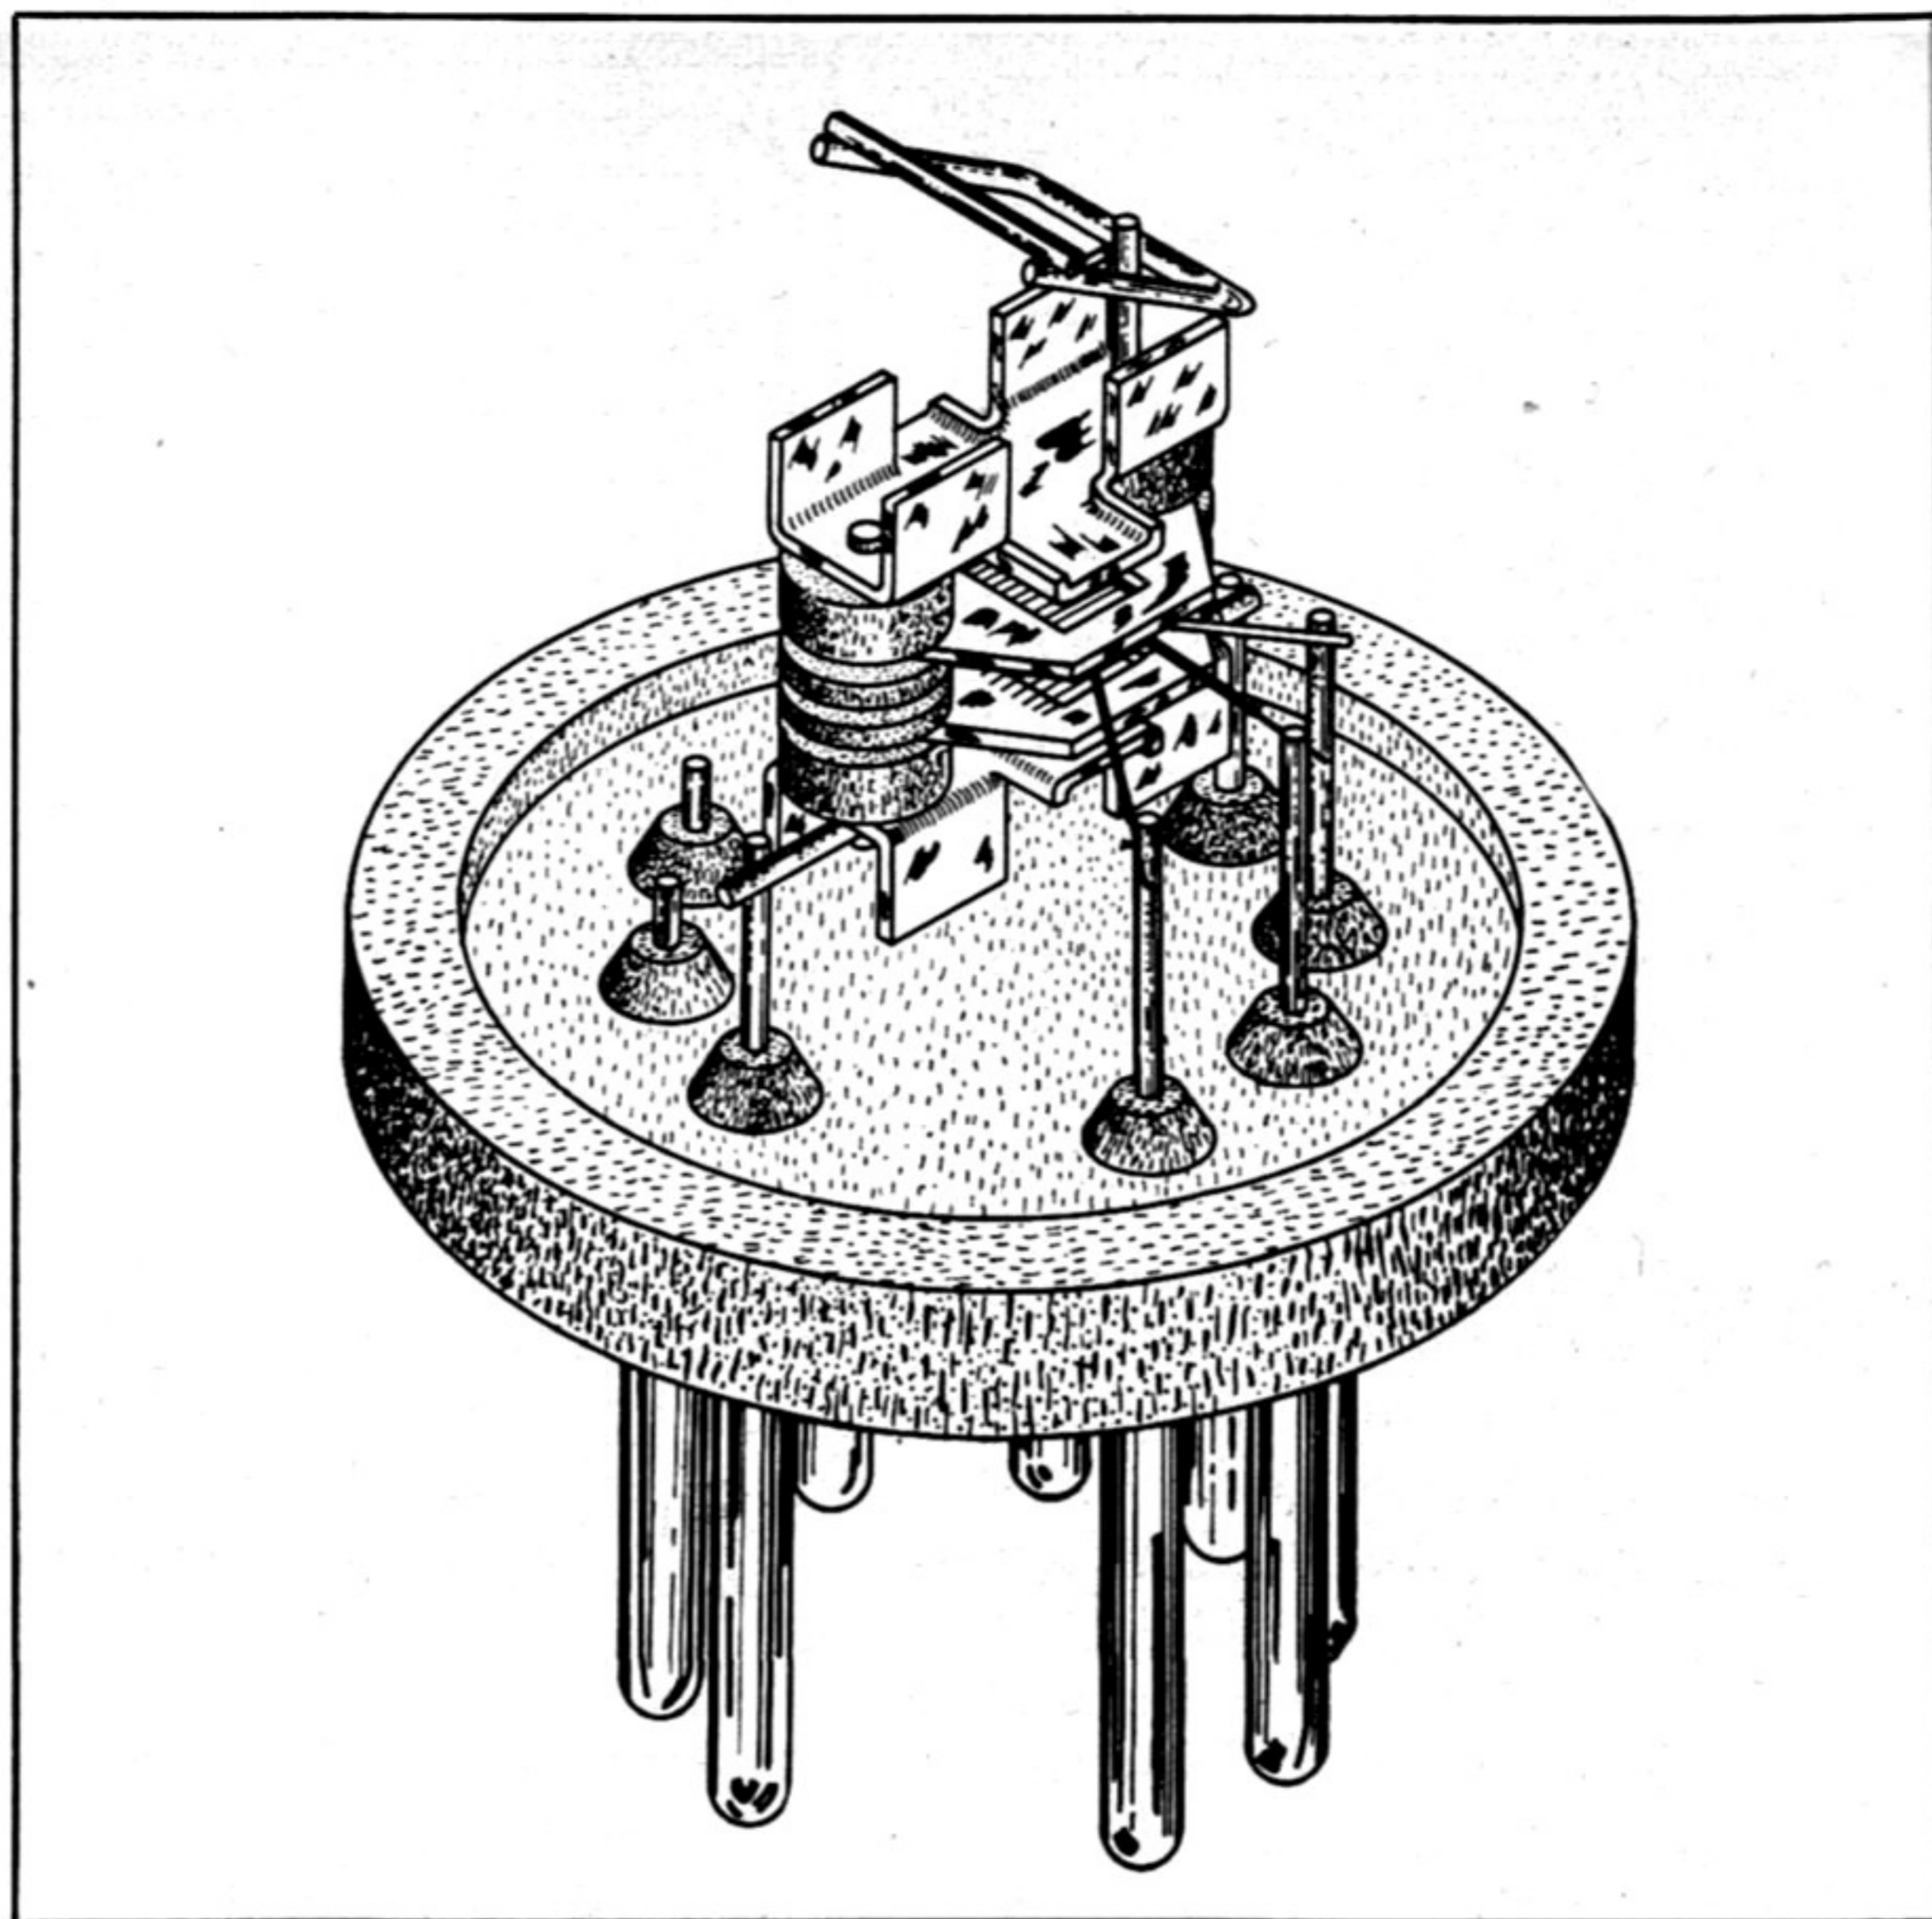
Type SN-1724D mount as assembled on ceramic stem. All elements are stacked on two vertical pins and positioned by ceramic spacers
